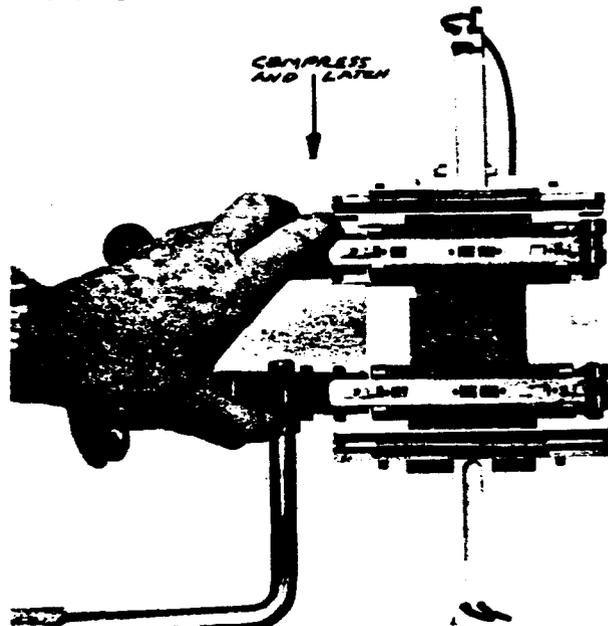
COMPRESSED CONDITION (PAR. 3.243)
